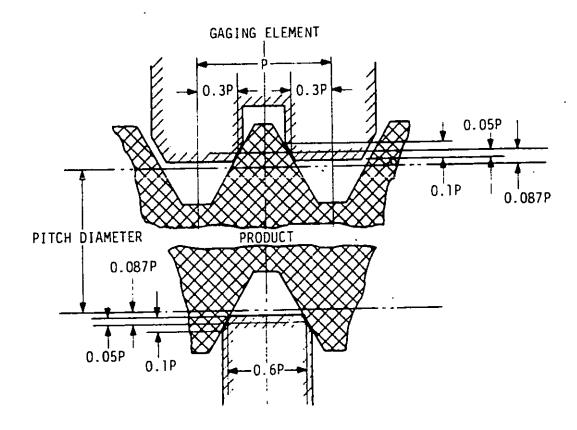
C.6 Gaging element profile for product external pitch diameter measurement and cumulative form analysis using short straight flank contacts 3.2 <u>Product external thread measurement, curved contacts.</u> Indicating and snap gage rolls with "best size" wire radius for the measurement of external pitch diameter are shown in figure 22.C.7. This type of gage approximates the three-wire pitch diameter measurement. It has point contact with the thread flanks. Indicating gage rolls, spaced 120 apart, are used on external product threads for cumulative form differential gaging. Alternate design may use cone and vee profile rolls with "best size" wire radius contacts.
